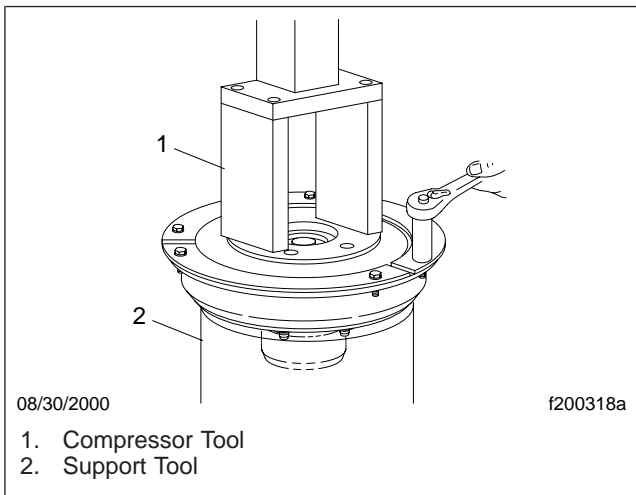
, Caging the Engagement Spring and Removing the Lining Retaining Plates
